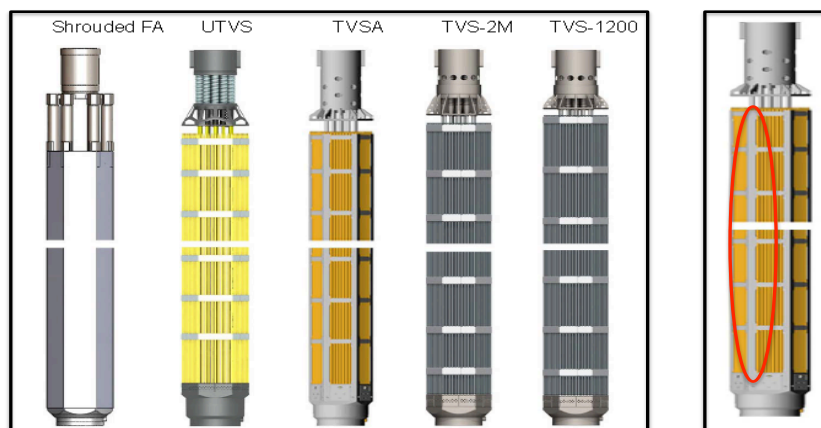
VVER Fuel Assembly Designs (Figure 1, [50])
